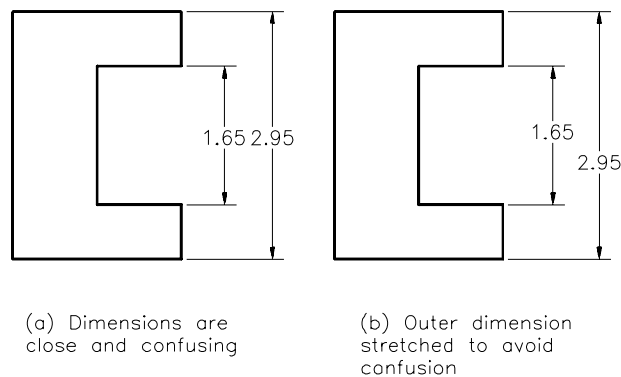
Drawing for Exercise 1, stretching dimensions
